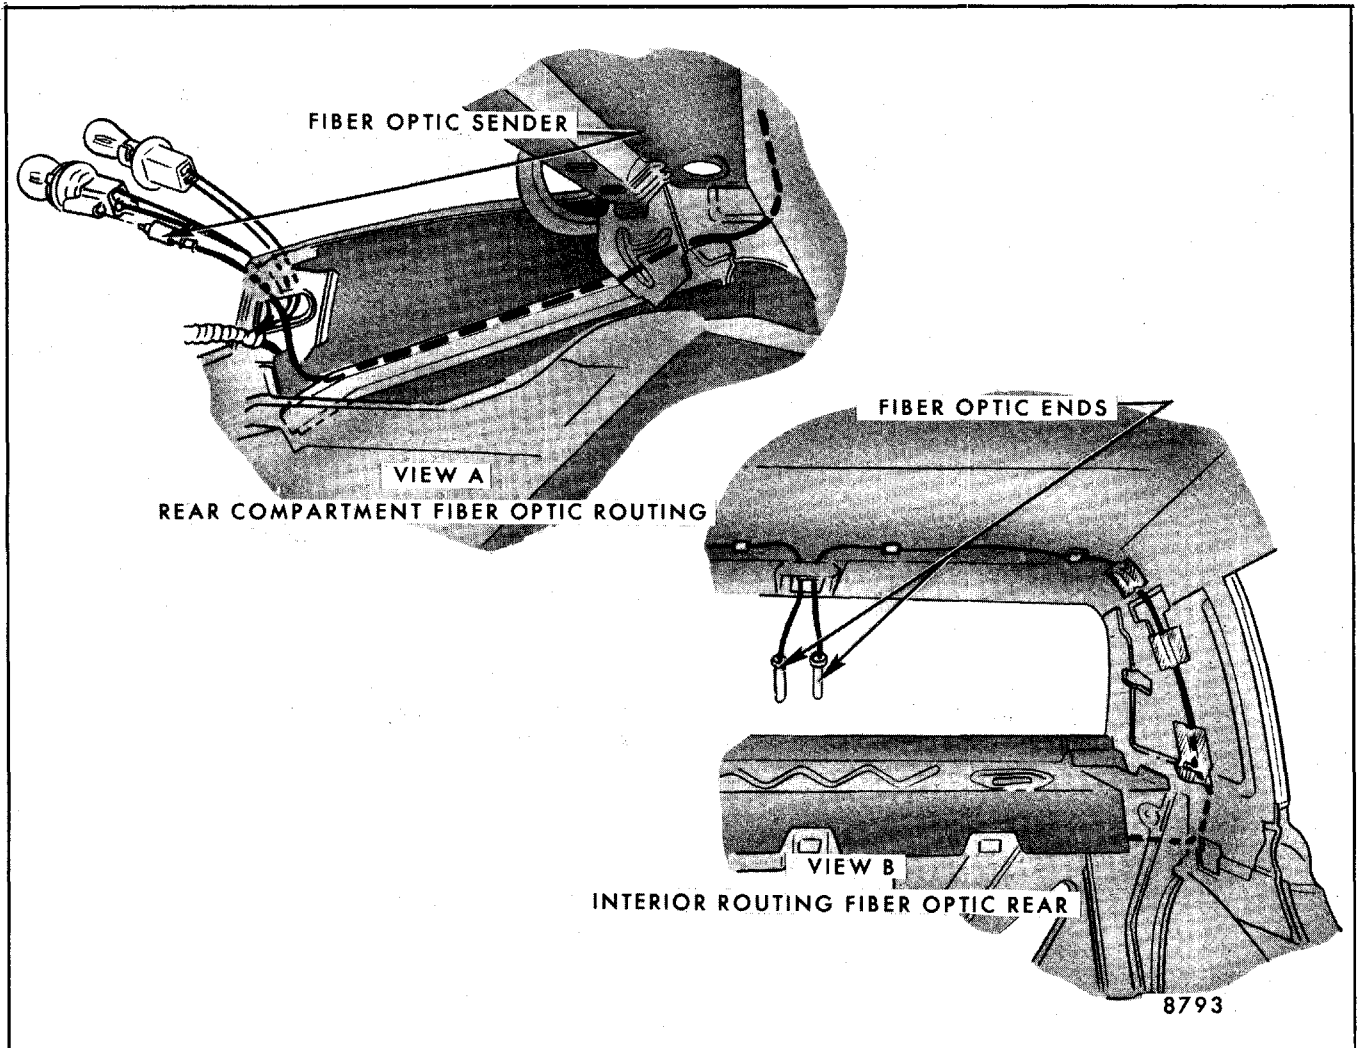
Fiber Optic Routing - Cadillac "K" Style - Right Side Shown, Left Side Similar
